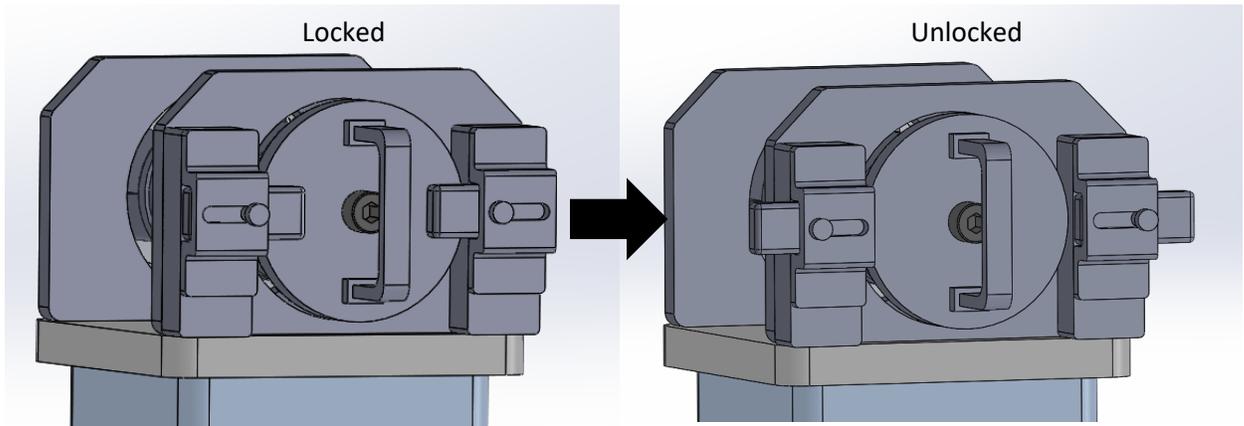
Illustration of latches' locking and unlocking in A-Stand Idle End Design Iteration #2
